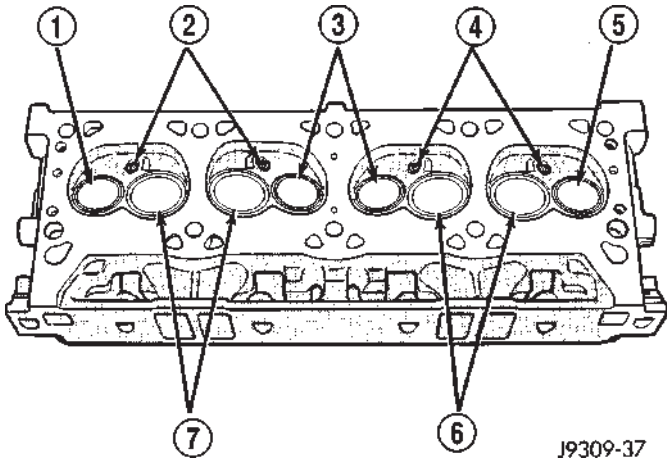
Cylinder Head Assembly—V-8 Gas Engines
